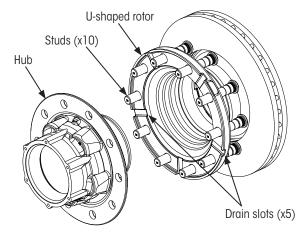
Hendrickson stud mounted hub & U-shaped rotor assembly
